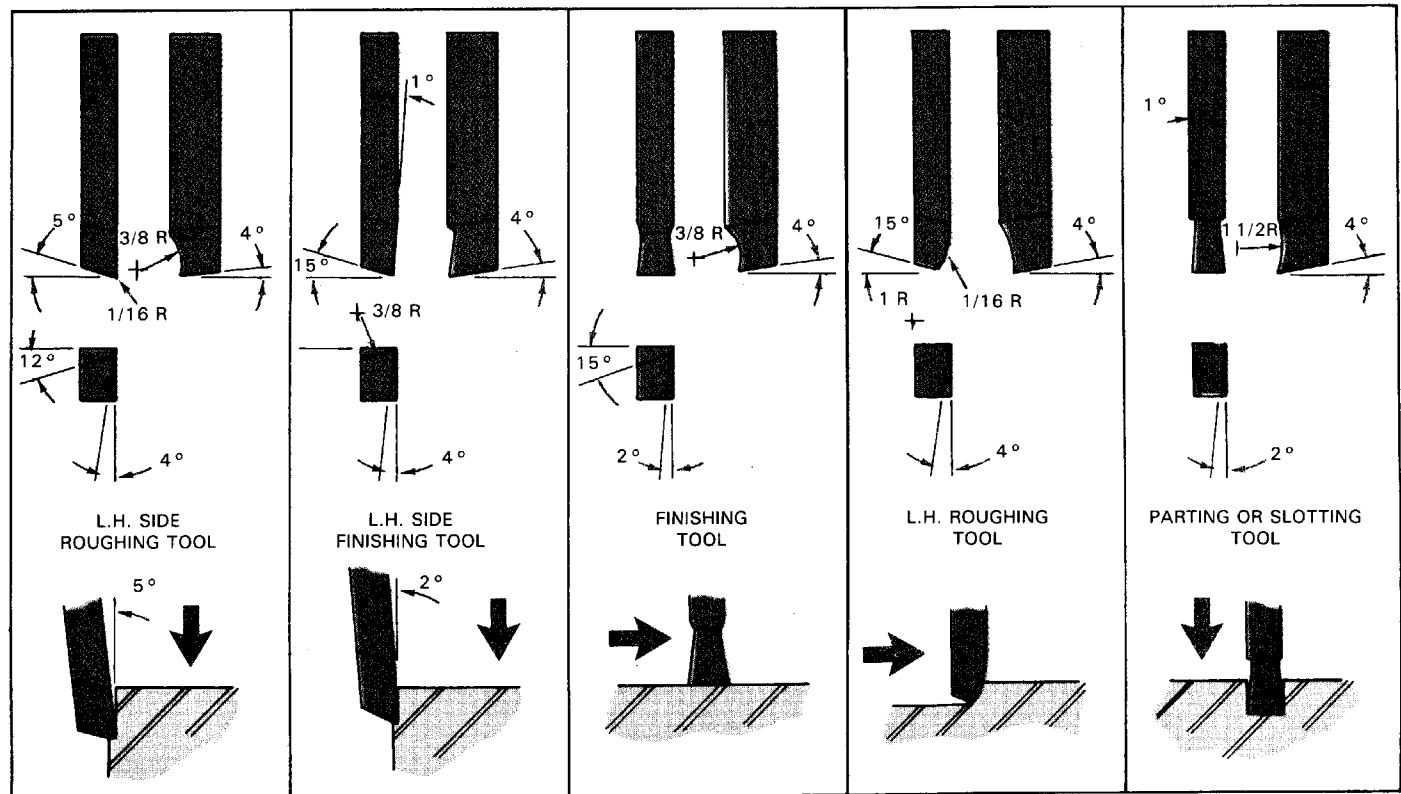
Note cutting tool shapes recommended for machining mild steel.
